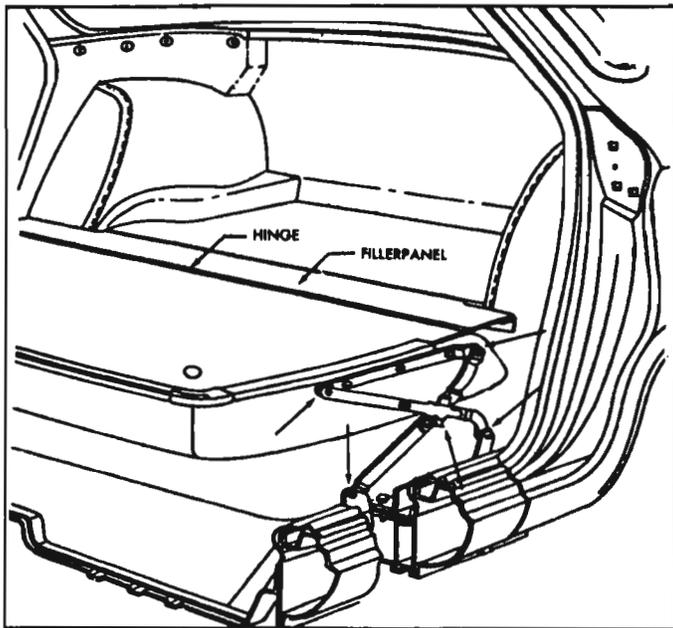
Rear Folding Seat Back Support Link Assembly
